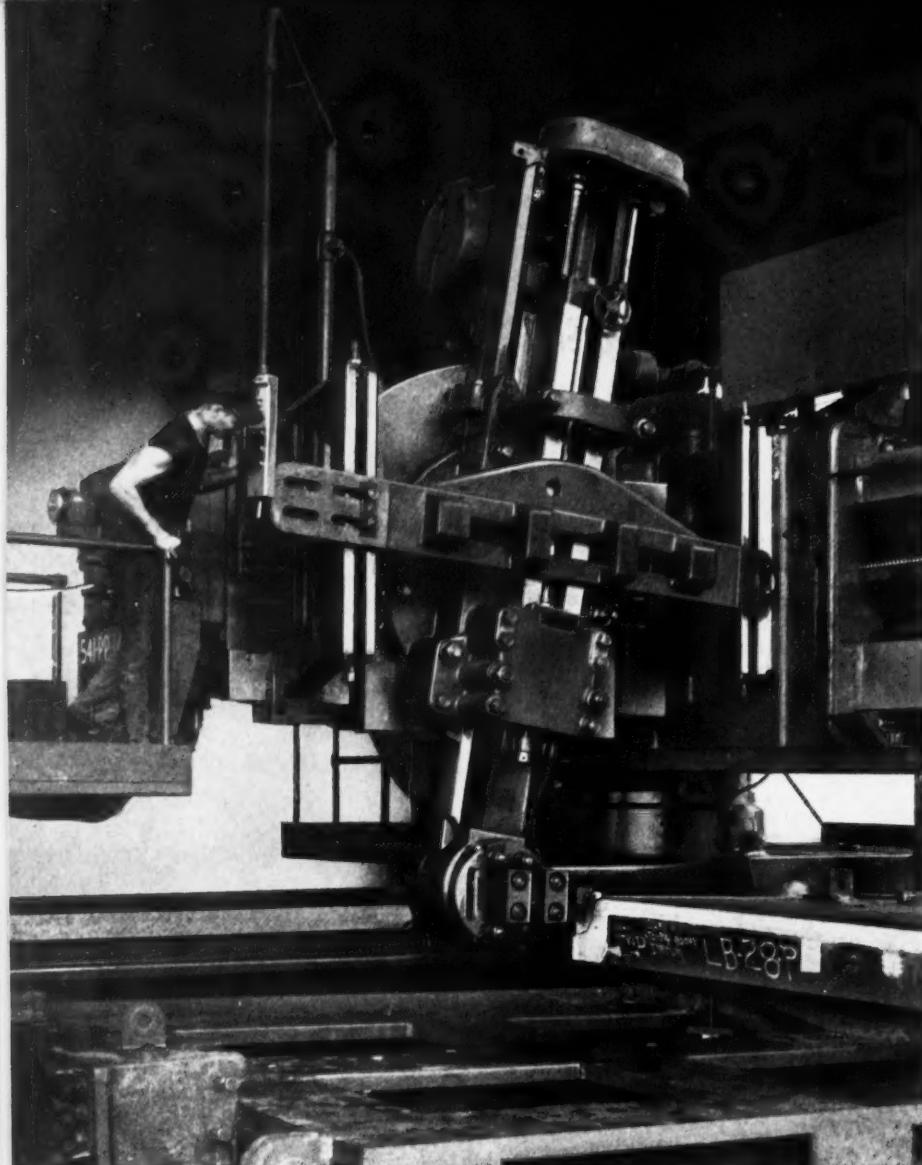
(Left) Close-up View of Transverse Tool-head on the Armor-plate Planer Shown in Fig. 3, which is Engaged in Taking a Cut across the End of a Fairly Thick Armor-plate Section
